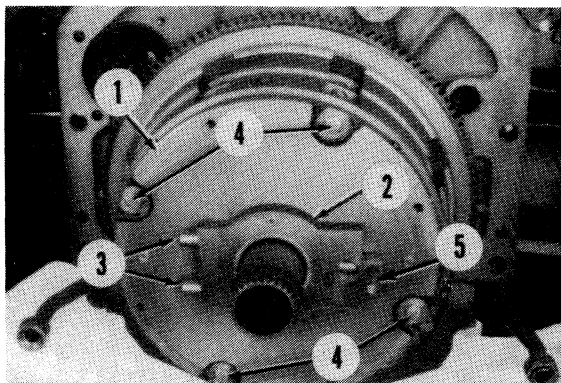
Before reconnecting engine to clutch housing on Power Shift tractors, make certain that seal rings on oil manifold (2) are interlocked, tubes (3) are bottomed in manifold and manifold is seated firmly against clutch drum (1).
